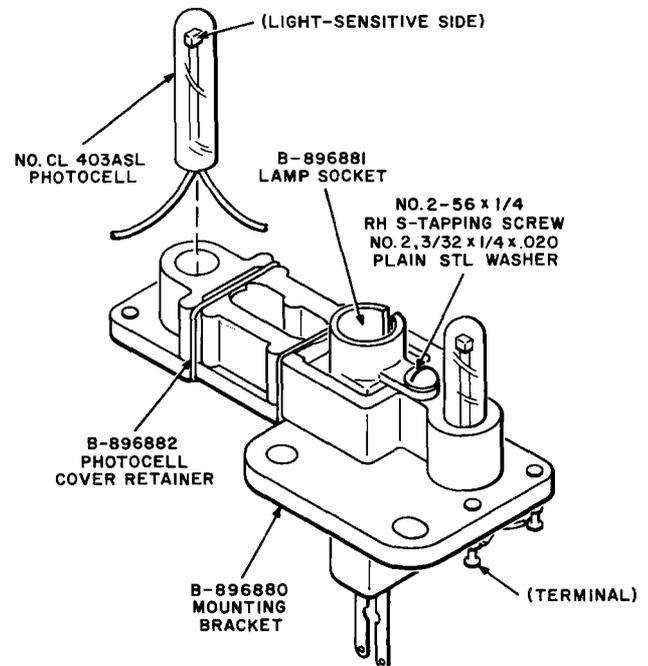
End-of-Tape Sensor Assembly — Partially Exploded View
